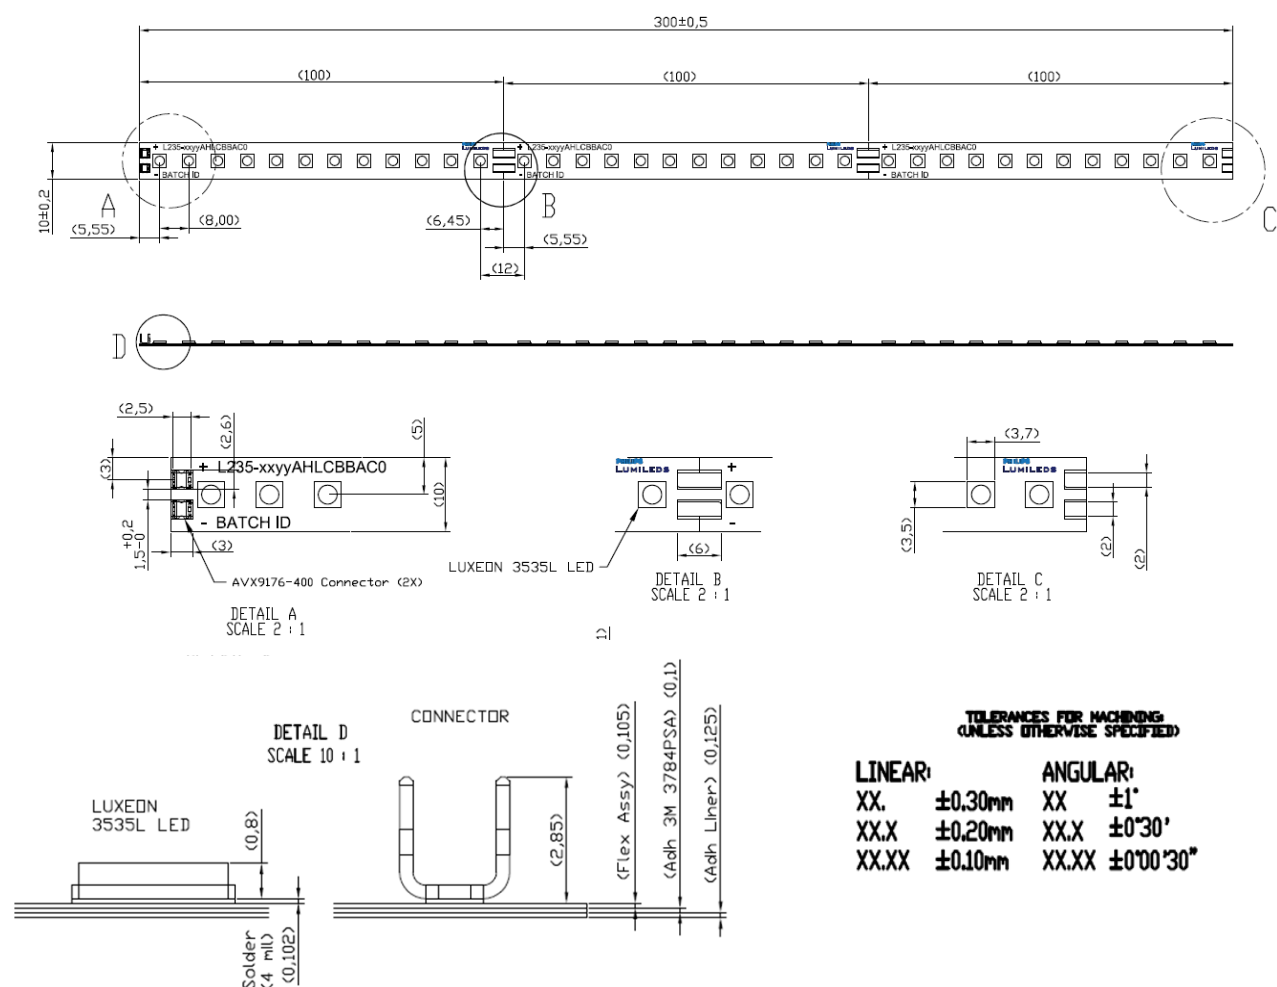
Mechanical drawing for L235-xyyyAHLCCBBACO.
